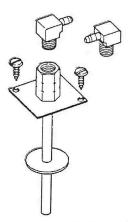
Remote sensing probe kit No. FTG18A-600R.
